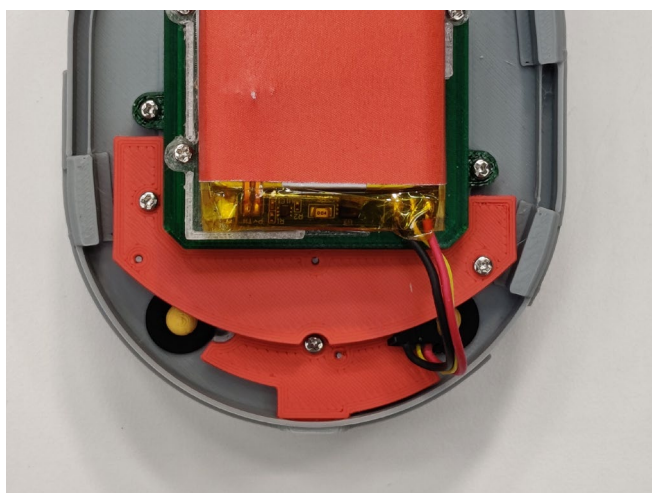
A cut-out in the power board makes the screw of the USB-C PCB accessible for easy removal.
